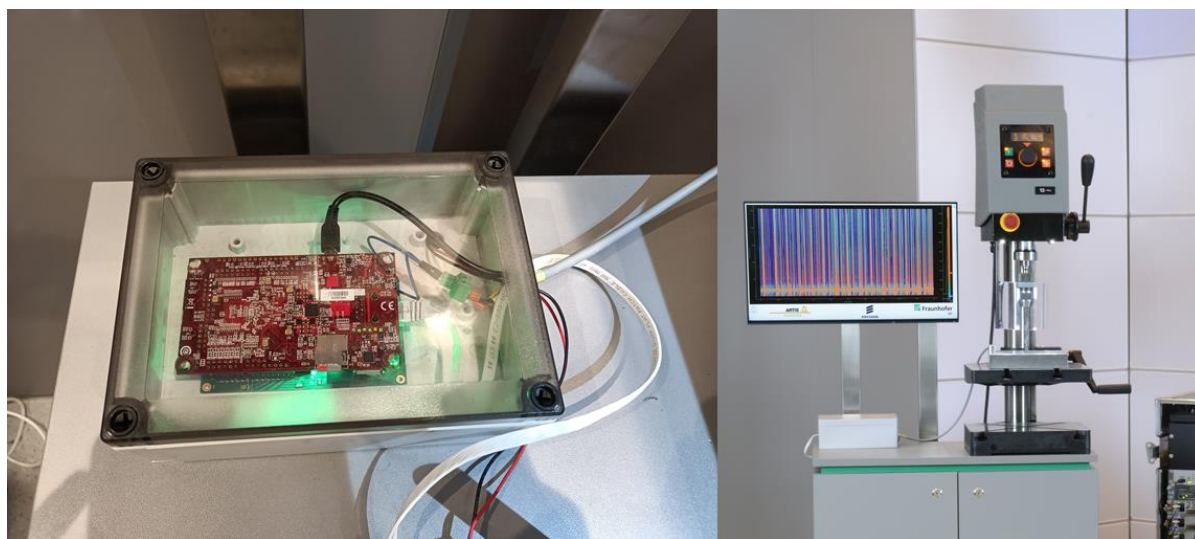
Left: AE sensor electronics consisting of a PCB for signal sampling and pre-conditioning, and FPGA-platform on top, contained in an IP68 grad housing. Right: drilling machine with workpiece, the AE sensing probe is directly attached to the workpiece and connected with the sensor electronics. The measurement signal is visualized as waterfall diagram plotted by an industrial PC receiving the sensor data.
